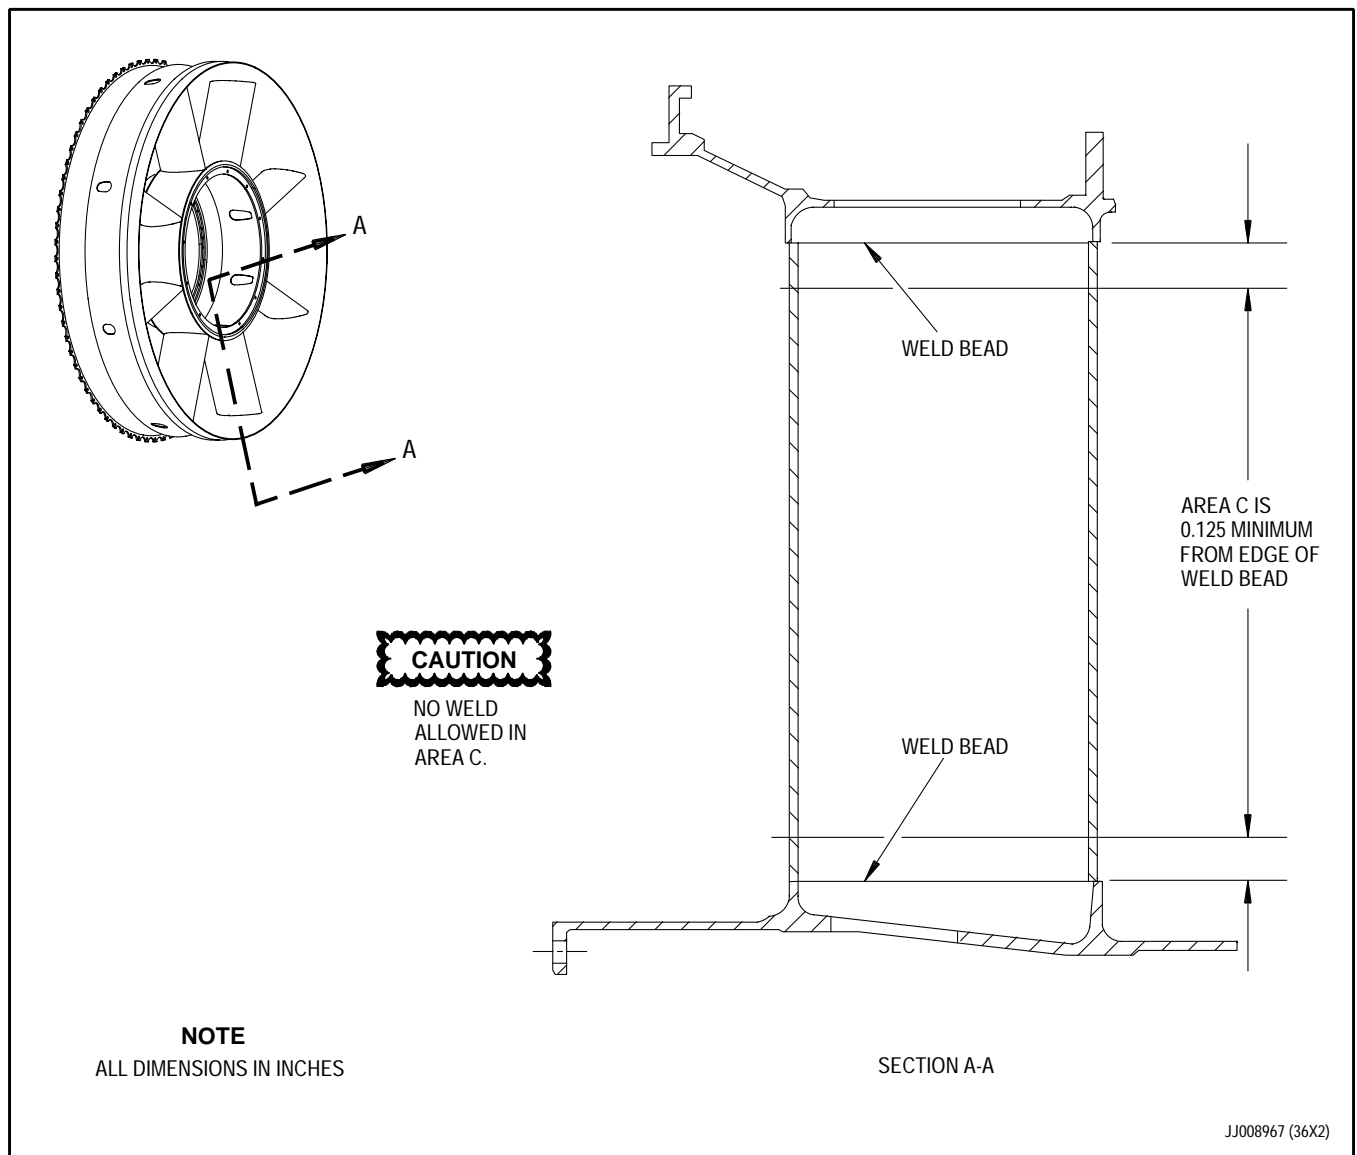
Turbine Exhaust Case Assembly - Weld Repair Strut
